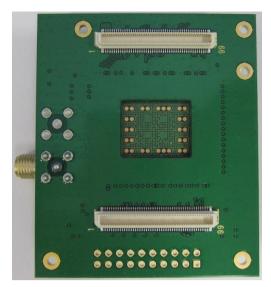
AirPrime SL6087 Socket Board with the AirPrime SL6087 Embedded Module (Bottom View)
